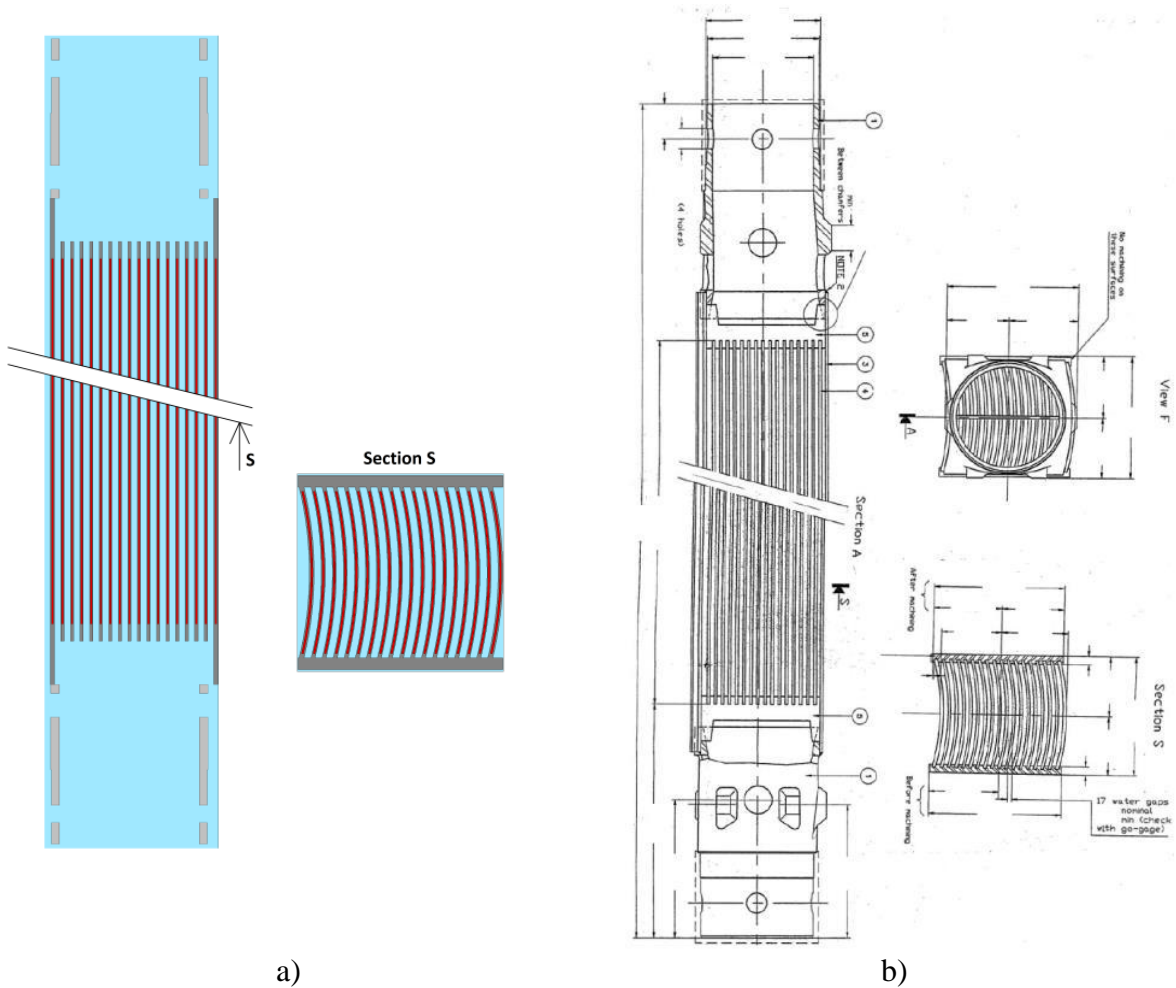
CF and CA fuel assembly type: a) Serpent model; b) CAD drawing from specifications
